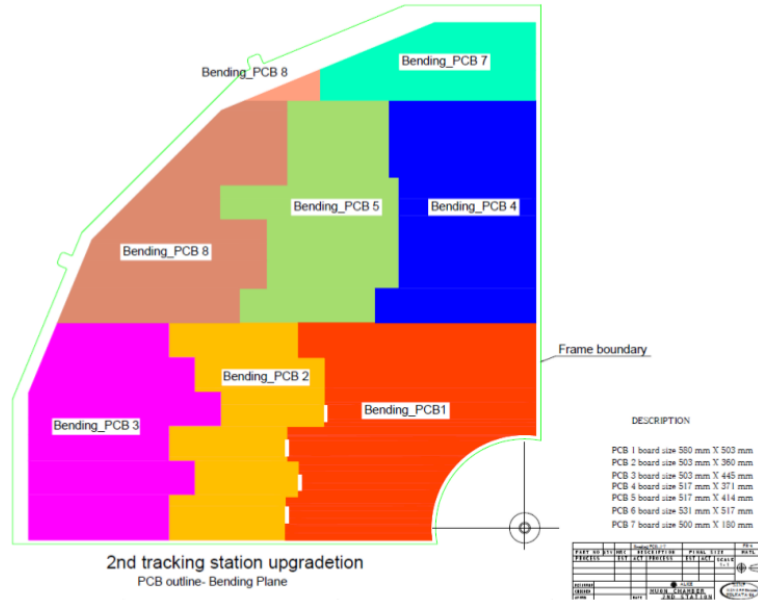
The arrangement of PCB segments in one CPC quadrant.
